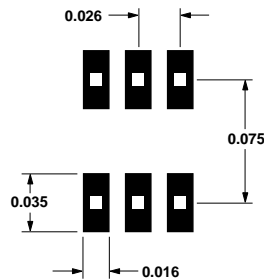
PCB Pad Layout for INA-31063 (dimensions in inches).
